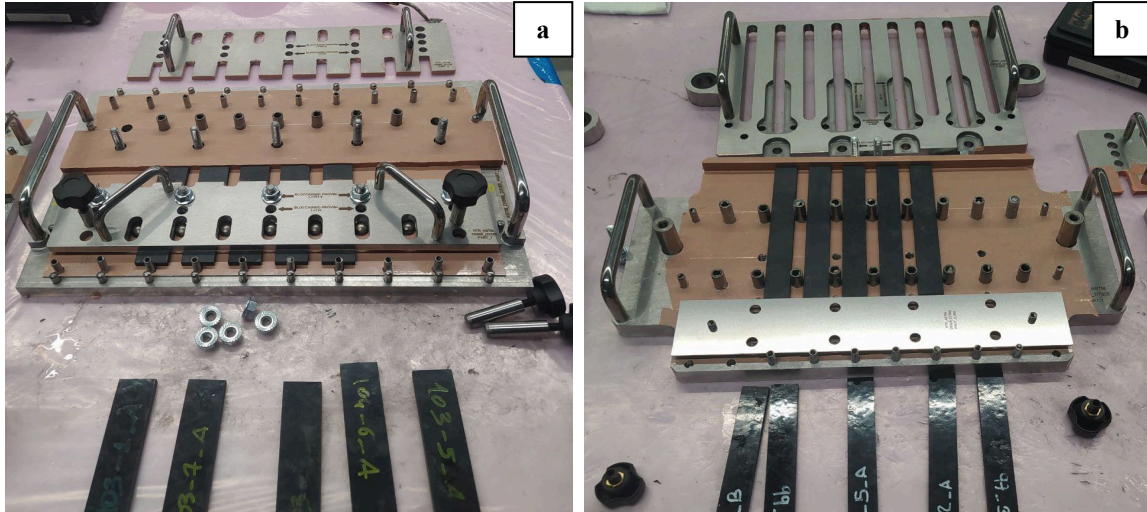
Custom design gluing jigs: a) SLJ gluing jig, b) DCB and ENF gluing jig
